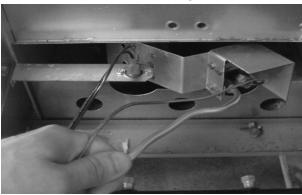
Installed Pilot Assembly (3 Section Shown)
